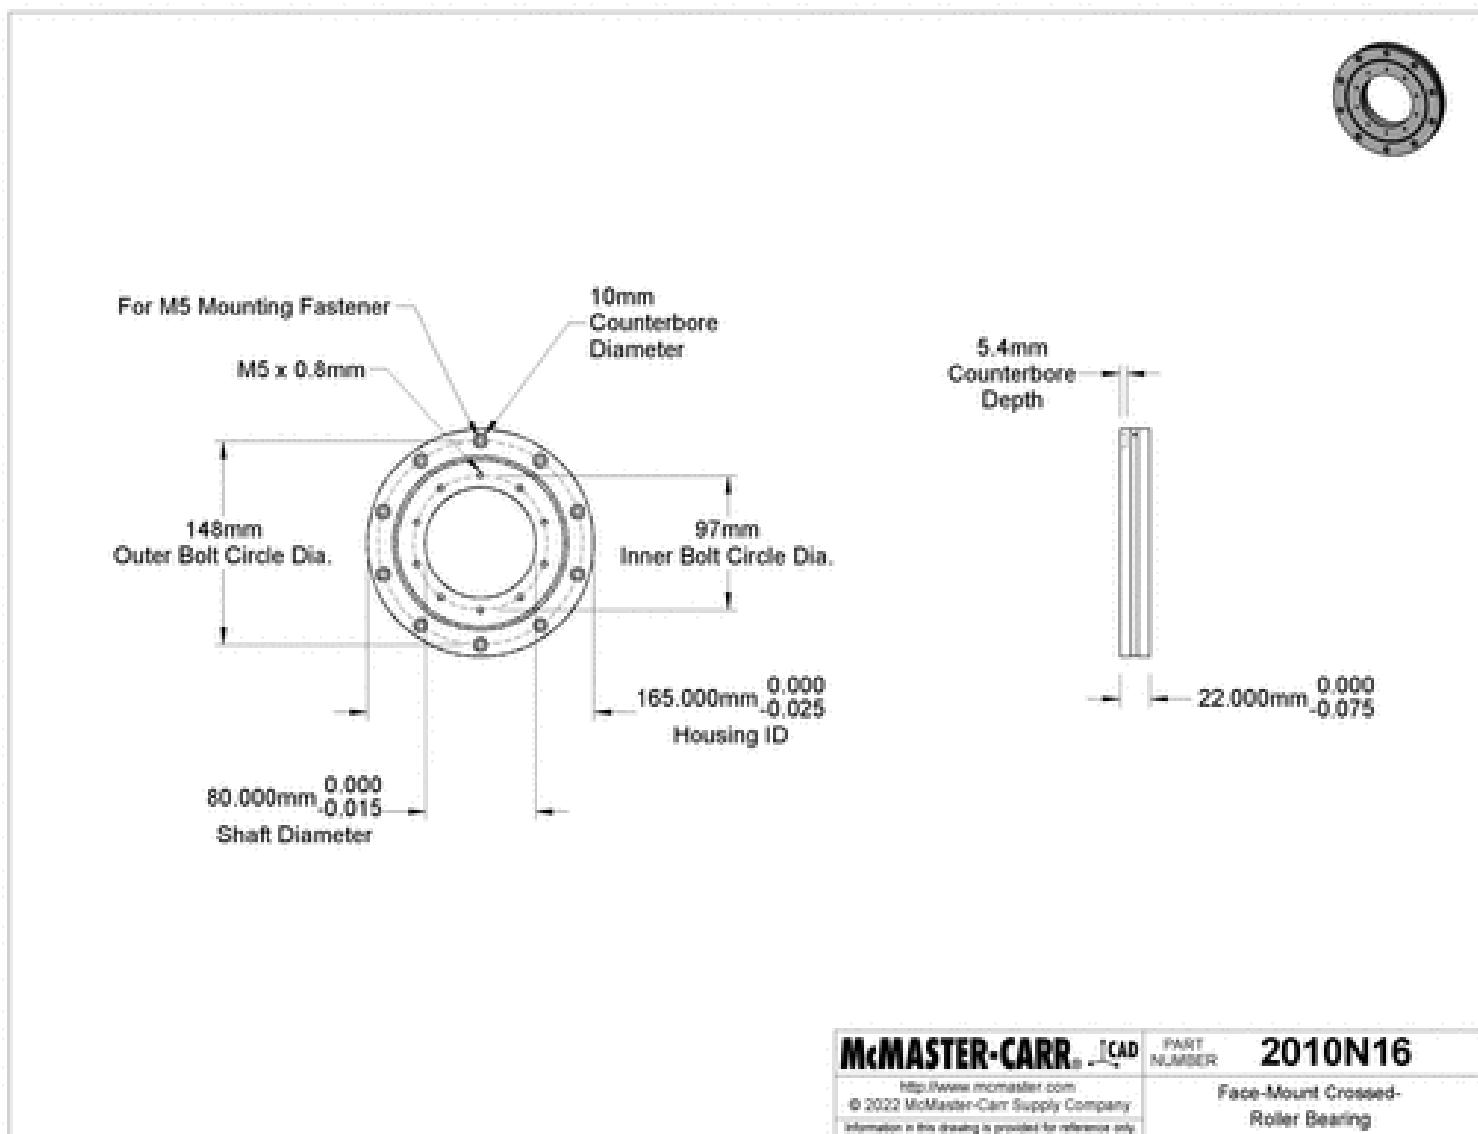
J1 Cross Roller Bearing Engineering Drawing
